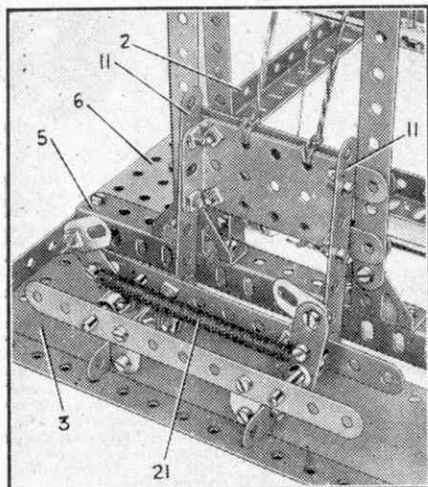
An enlarged view of the hoisting carriage, showing the slides and the spring catch for holding the truck in position.
